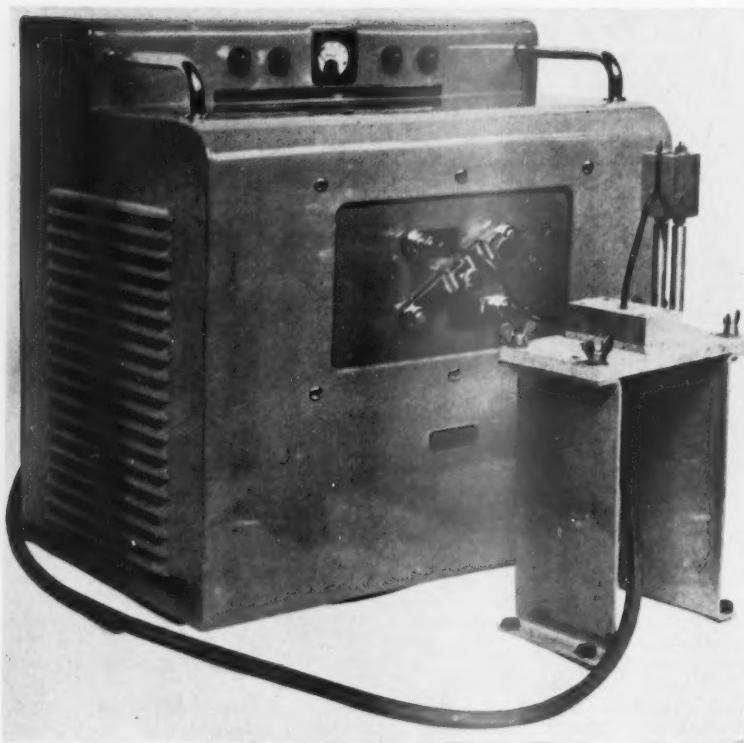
Delapena induction heating equipment with simple hand-loaded fixture for brazing automobile oil pipes
